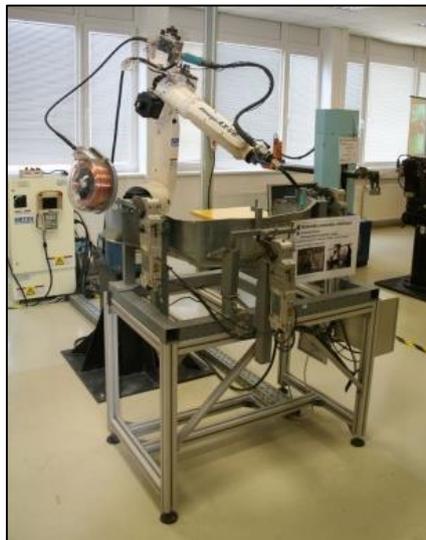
Workplace with industrial robot OTC ALMEGA-AX-V6
